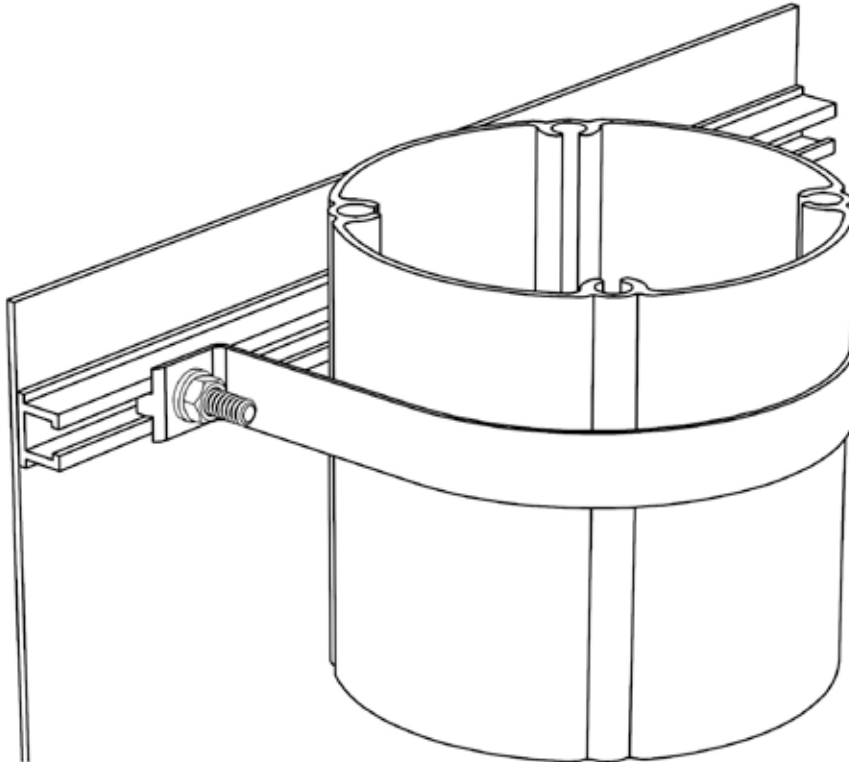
, Showing Mast, Clamp & Sign Channel arrangement
